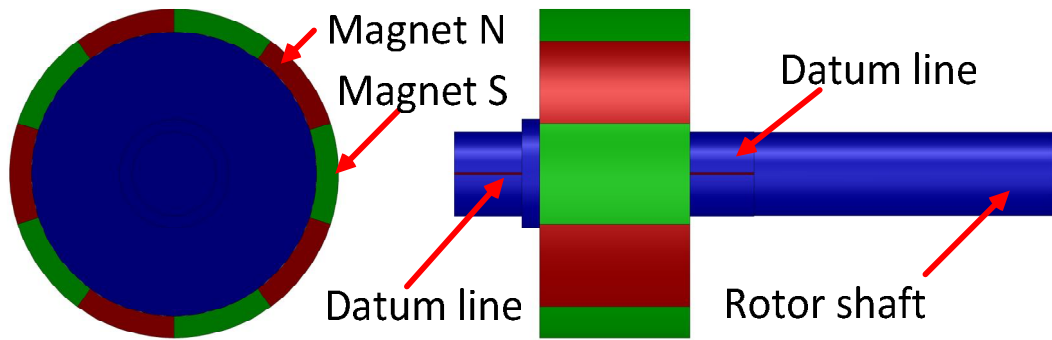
Rotor structure with datum line on rotor shaft
